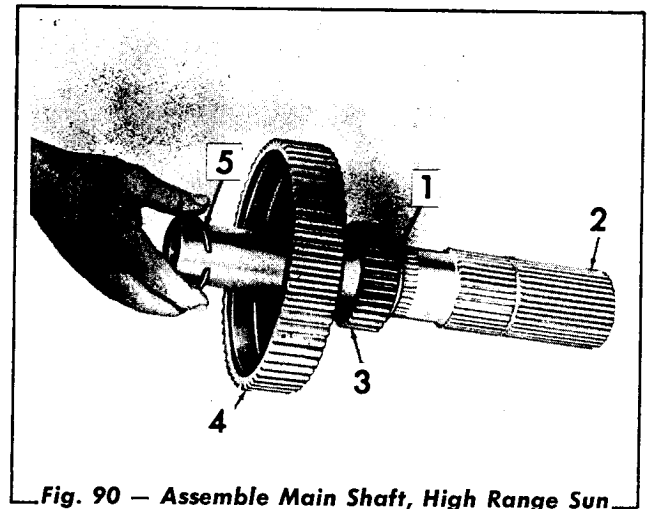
Assemble Main Shaft, High Range Sun Gear, and Intermediate Range Clutch Hub
